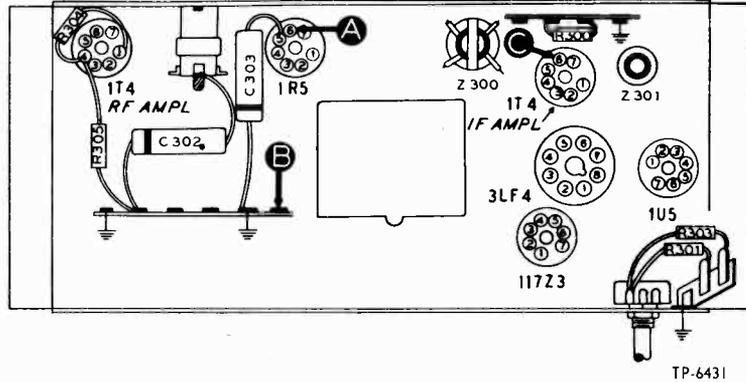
BOTTOM VIEW, SHOWING SECTION 3 TEST POINTS
